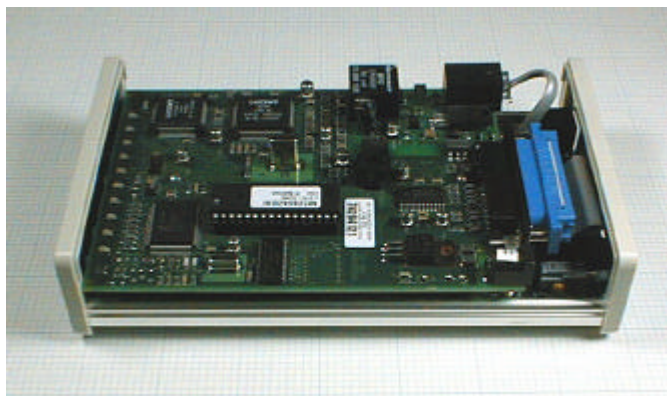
Multi-chip Cryptographic module printed circuit board with modem mounted on top in an enclosure with Top removed (to show assembly).
